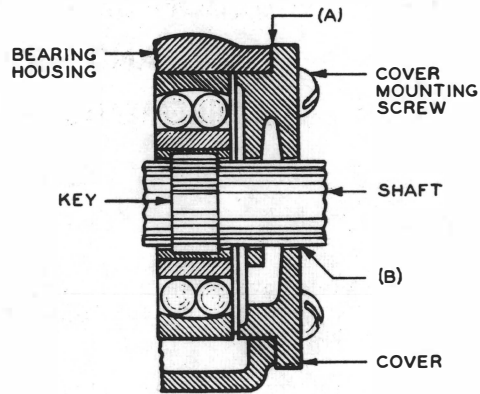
Sealed Joints and Oil Closures (5-, 6-, 8-, 9- and 12-type Bearings)
